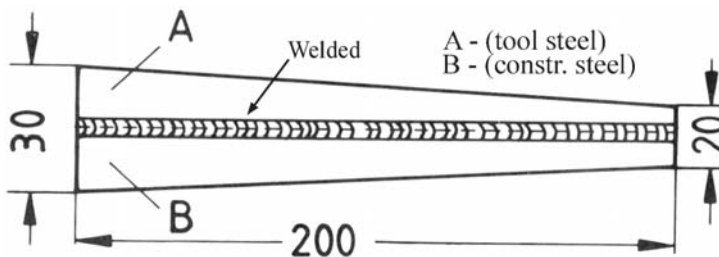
Geometry of the welded sample for the laboratory hot rolling experiment
